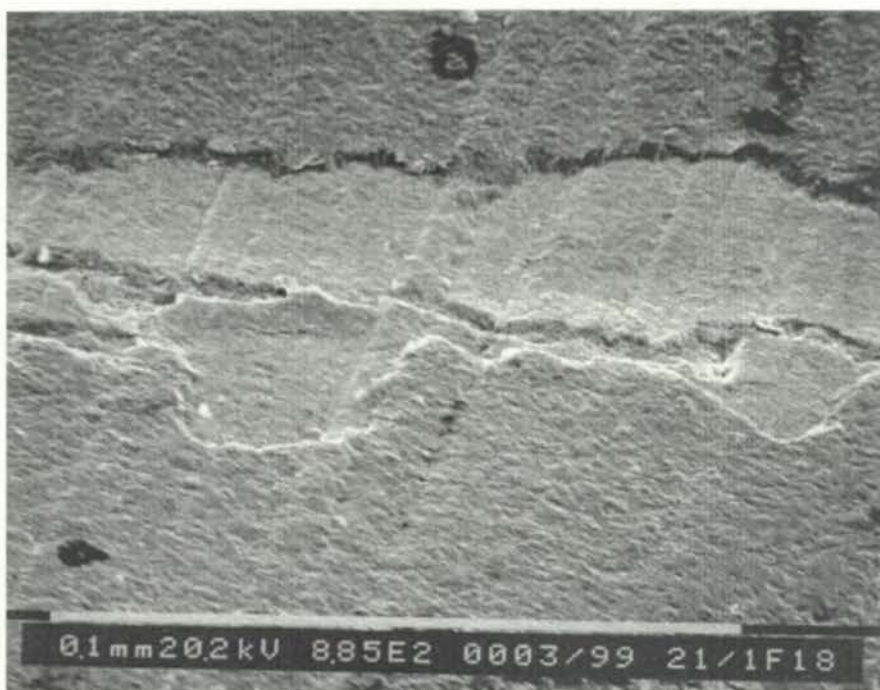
93 Magnified view of Figure 7.91 showing pealed Al_2O_3 top coating layer due to deformation of the rake face of KC994M tool
